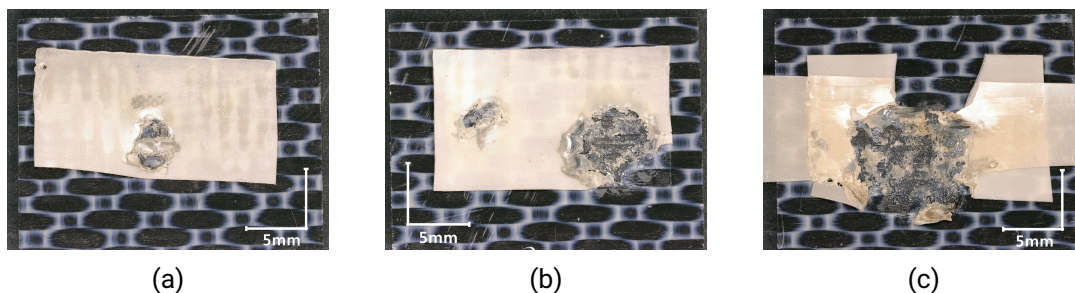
Fracture Surfaces with Indication of Guided Melt Initiation
